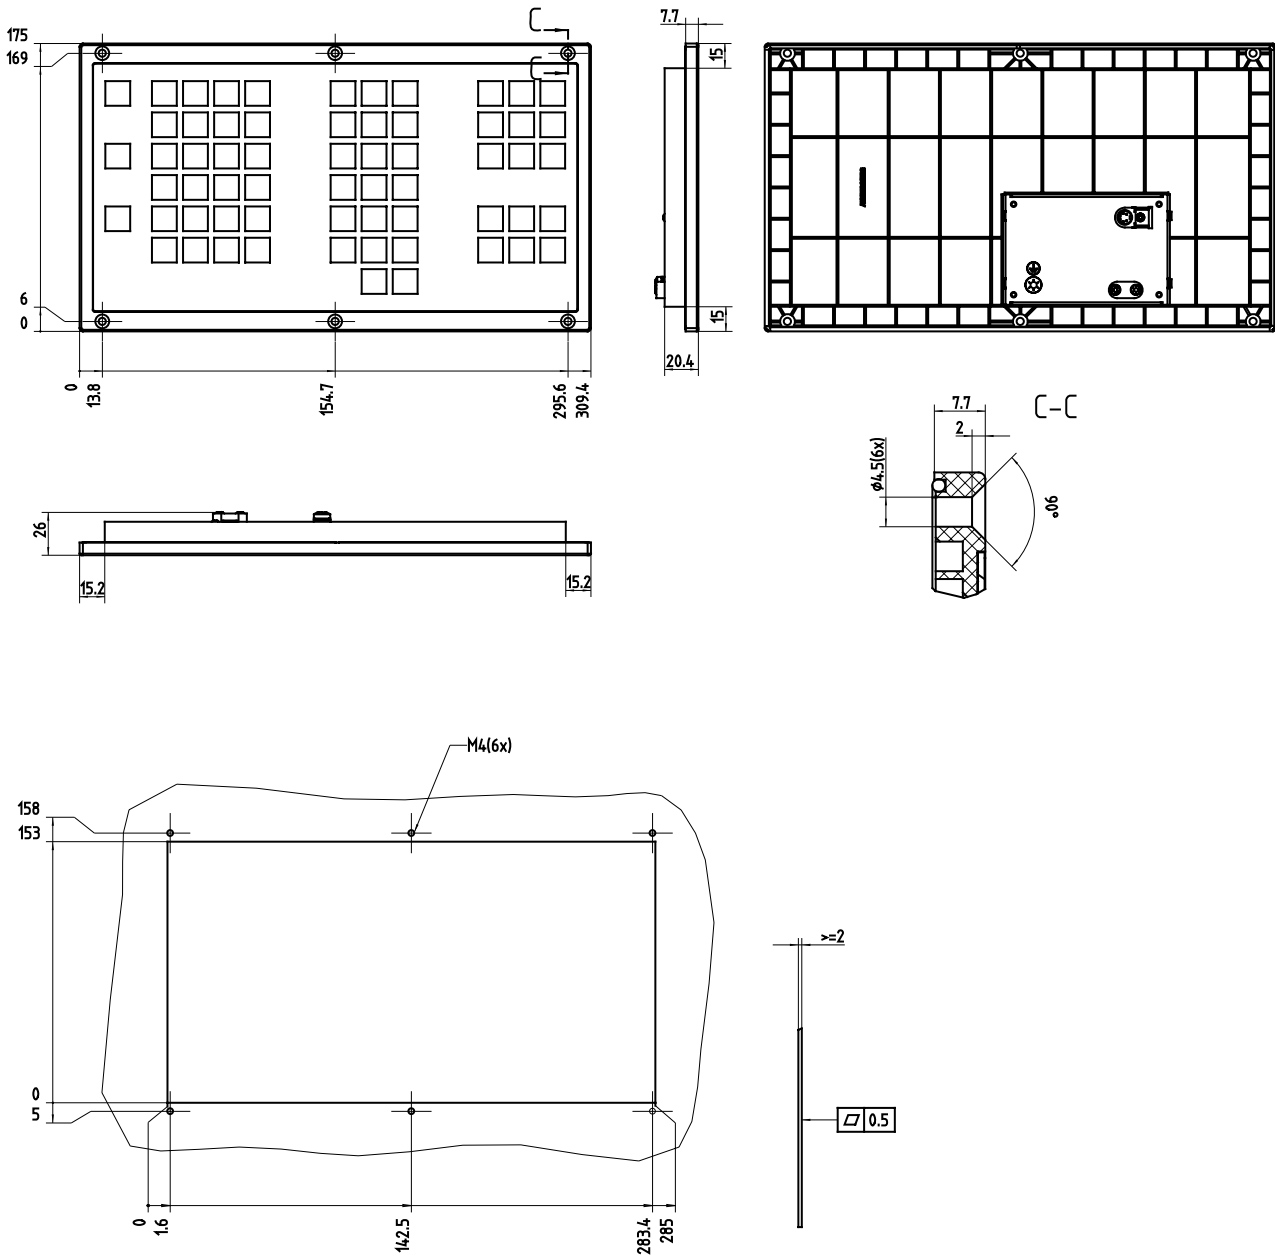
Dimensional drawing and hole drilling template of the NC full keyboard (installed under the PCU)
